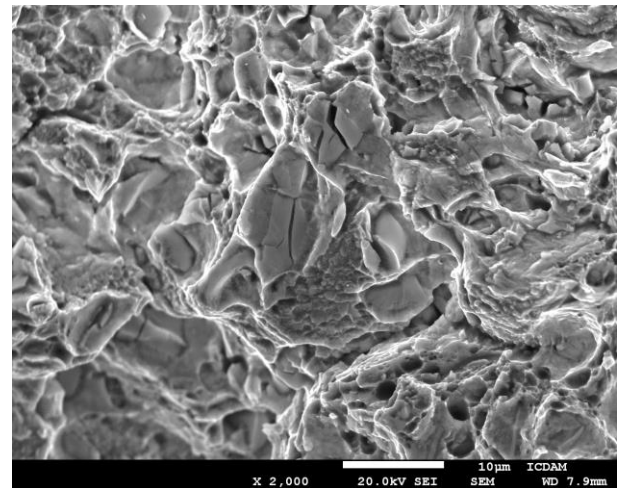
Brittle fracture surface of exposed SUPER 304H steel in E-NA state
